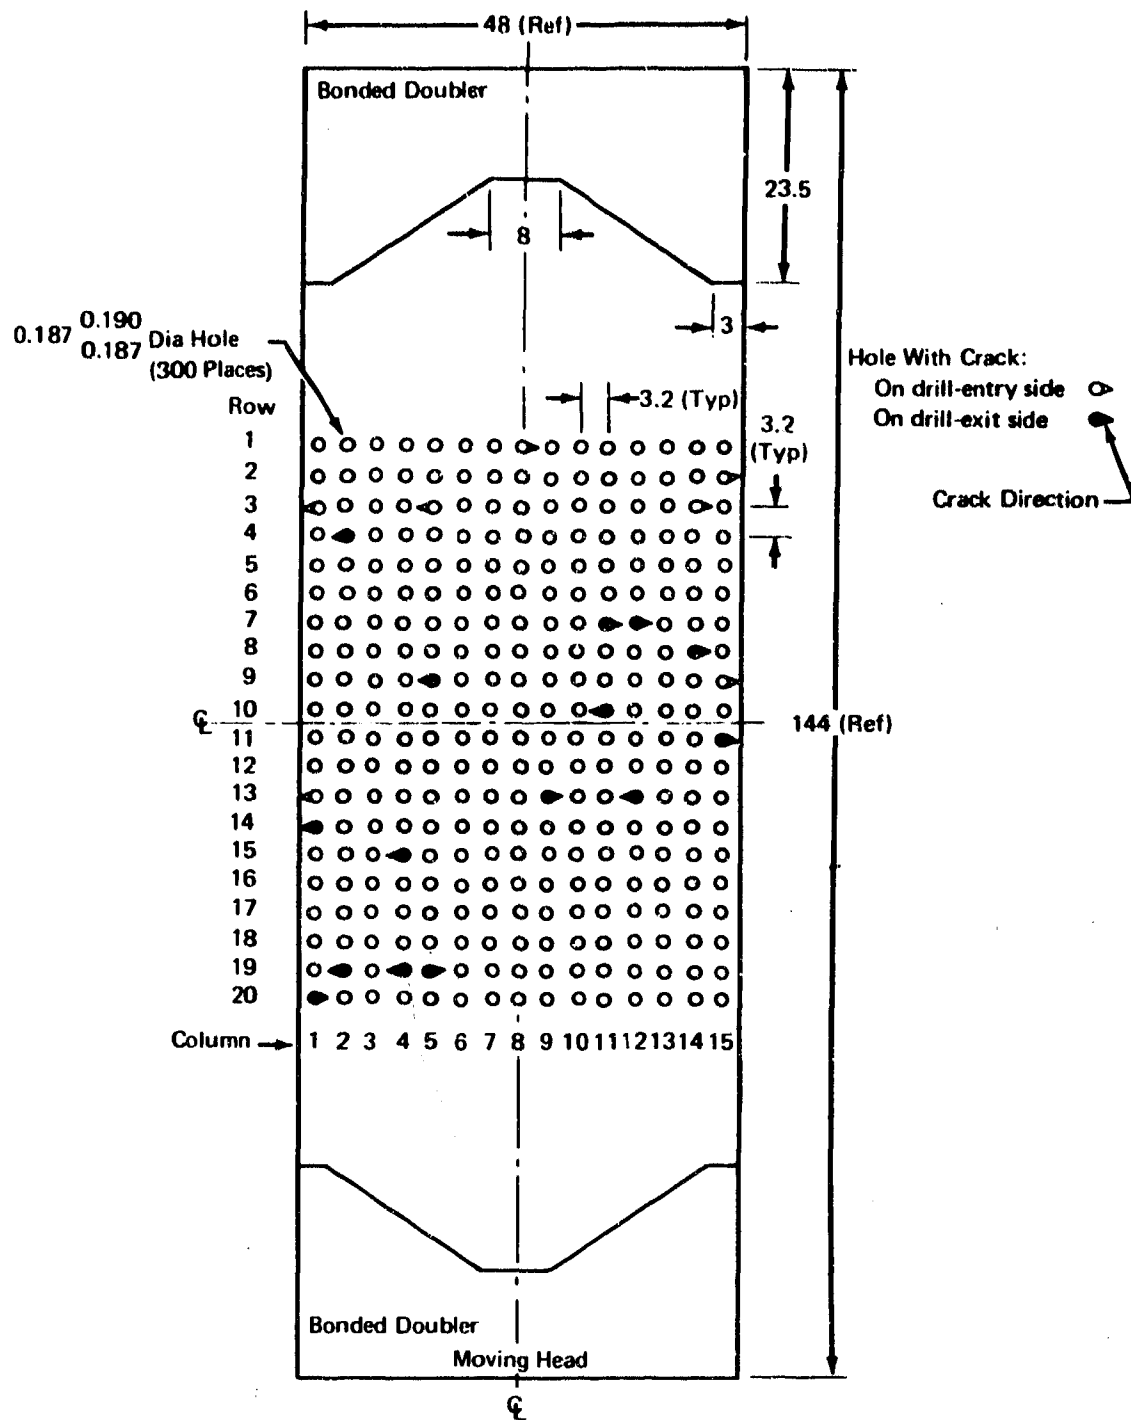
Location of Fatigue Cracks on Panel 1
